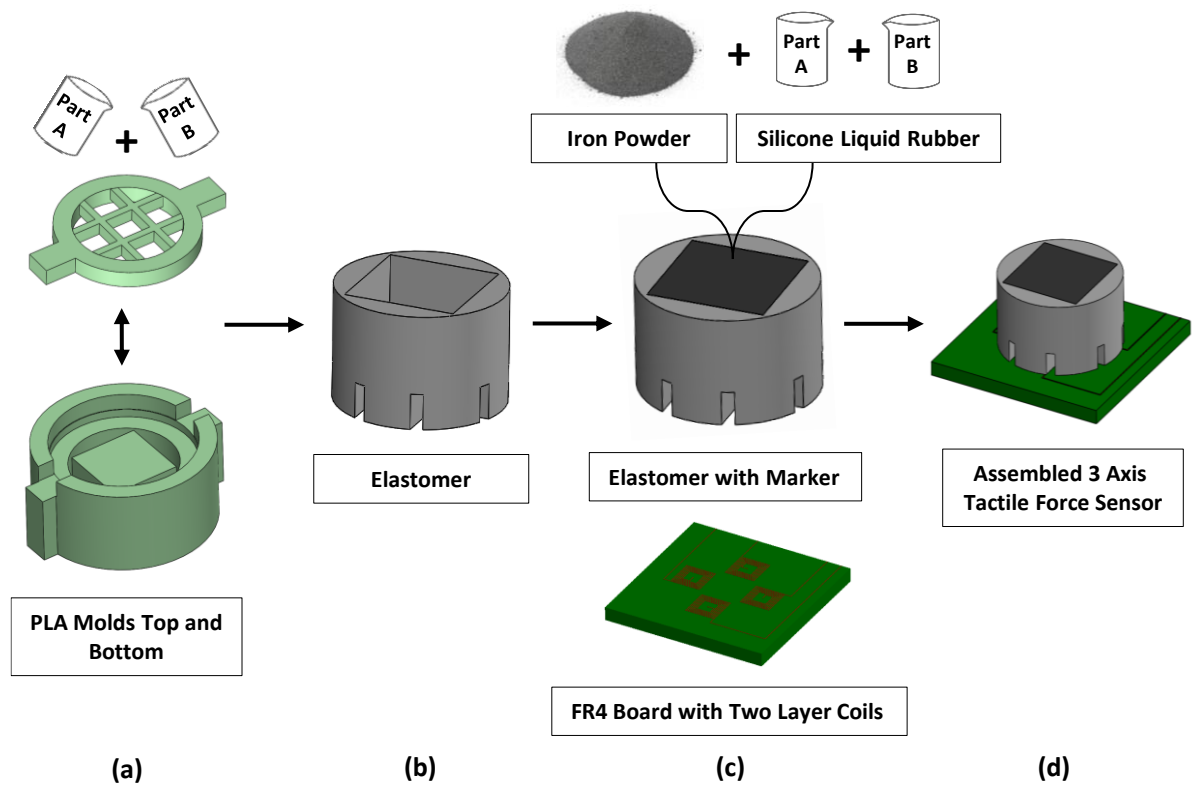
4 Fabrication stages of the proposed inductive tactile force sensor (a) 3D printed molds for elastomer preparation (b) Ready patterned elastomer (c) Elastomer with marker preparation and fabricated PCB (d) Final assembled sensor.
